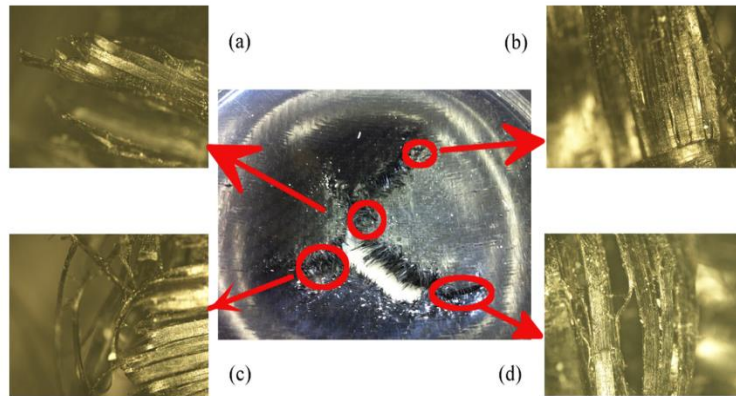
Failure in W200-[0 deg,90 deg] SRPP specimen during stamp forming
